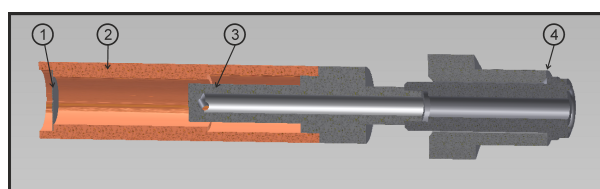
Cross section of the Inventor drawing of the Knudsen cell. The front aperture (1, grey, 150 μm \varnothing) used in this setup was a commercially available molybdenum plate (A0610M, Plano GmbH, Wetzlar). The aperture is held by a copper body (2, orange) which also serves as the gas reservoir. It was brazed to the cylindrical gas supply and mounting tube (3, grey) which had a connection hole perpendicular to the effusion direction. This assembly was fixed in the sample mount using a seal (4, 1/8 inch \varnothing , Swagelok VCR[®]) with copper gasket.
